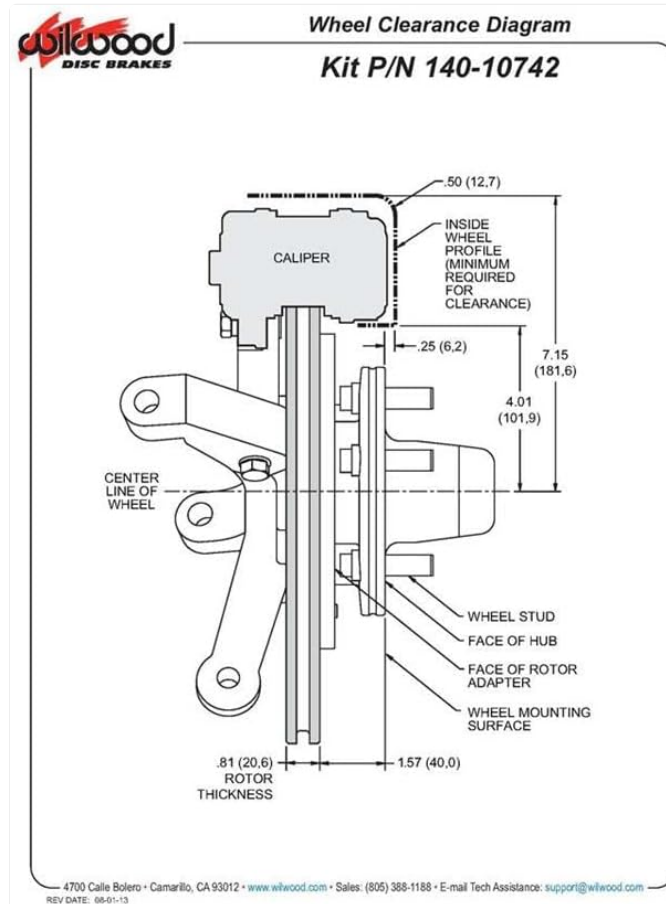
Wilwood Wheel Clearance Diagram for Kit P/N 140-10742. This diagram provides critical dimensions for ensuring proper clearance between the caliper and the vehicle's wheel, indicating minimum required space for safe operation.
